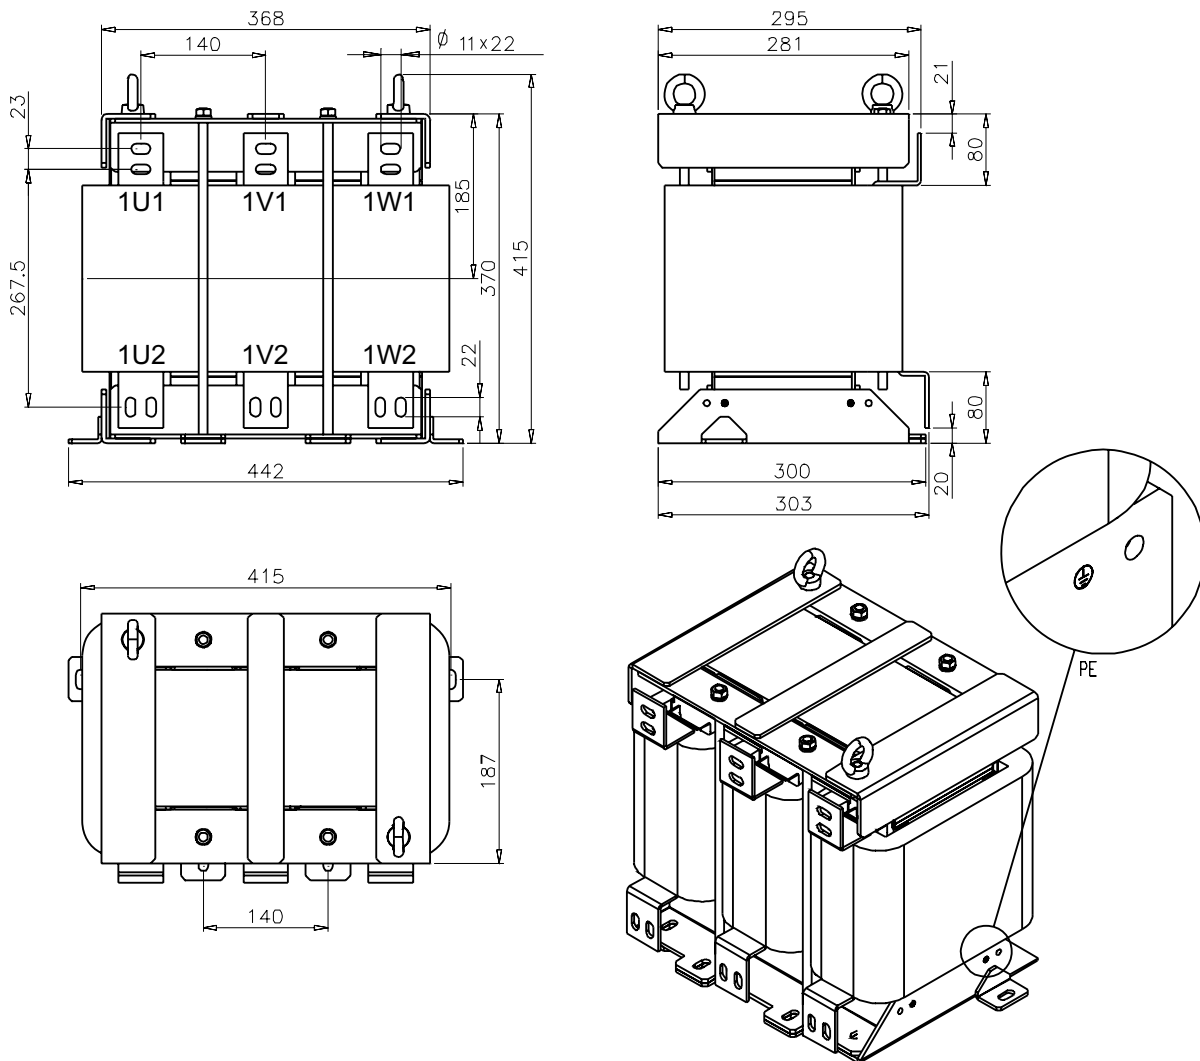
Dimension drawing of line reactor 6SL3000-0EE37-6AA0, all dimensions in mm
